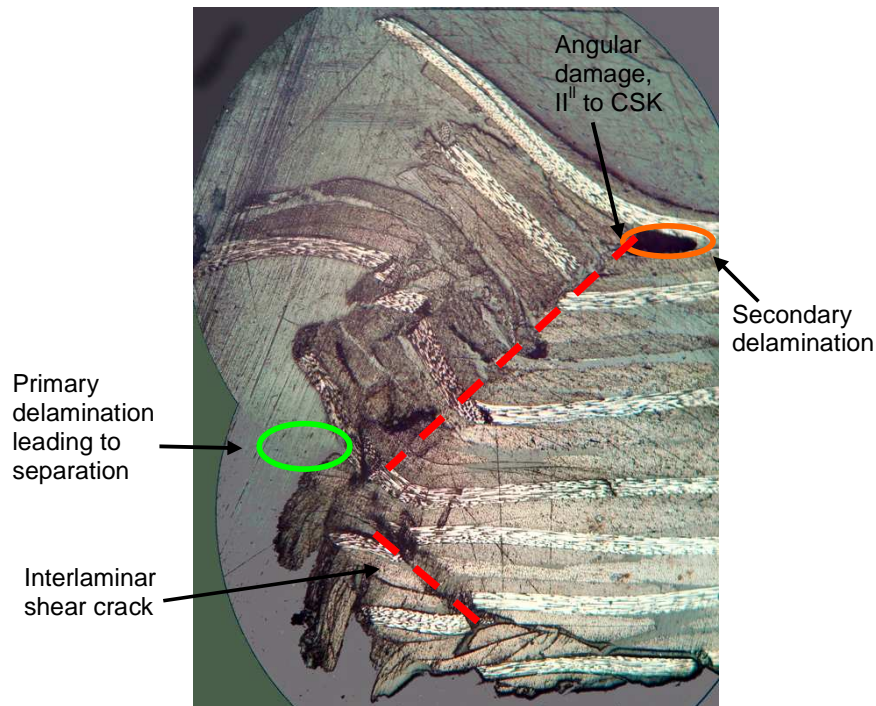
Damaged upper laminate at 0° section for joints with 0 Nm bolt torque
